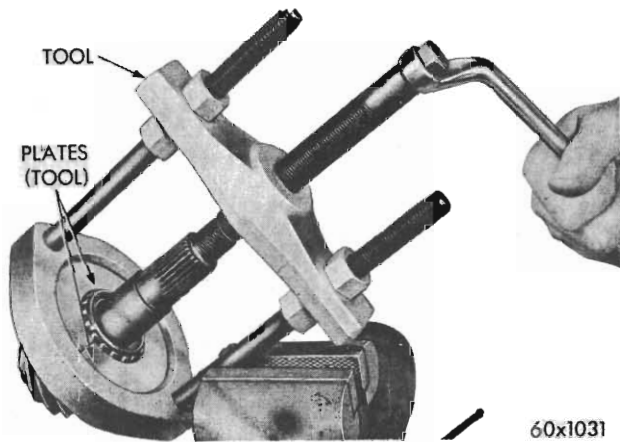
Removing pinion rear bearing using Tool E1673.
